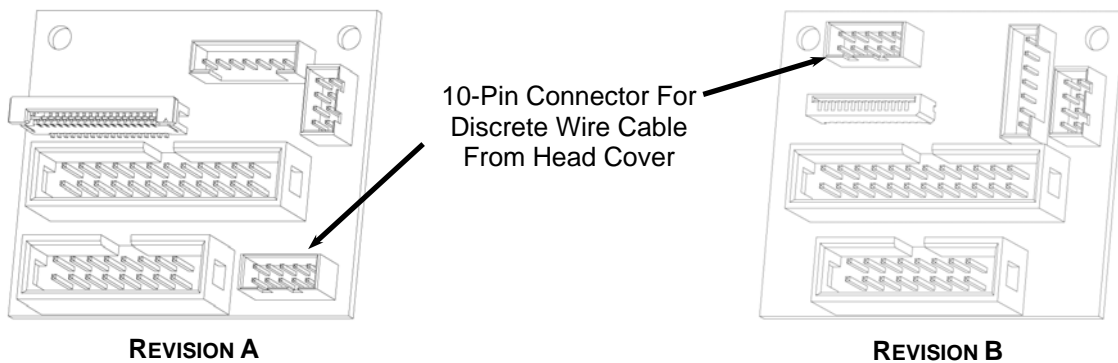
LOCATION OF CONNECTOR FOR HEAD COVER CABLE FOR THE EARLIER REVISION A AND LATER REVISION B MACHINES
